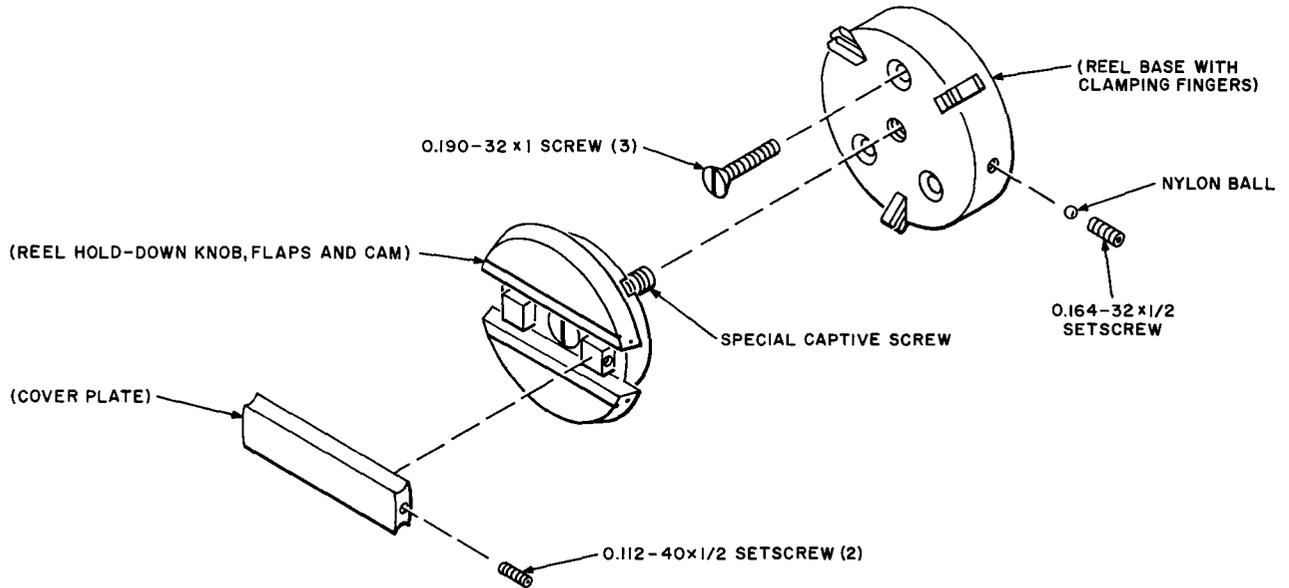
KS-19125, L102 (NAB) Reel Hold-Down Knob Assembly — Exploded View
